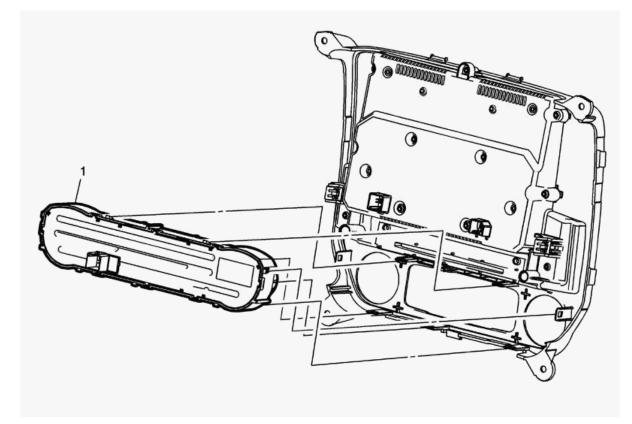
Heater and Air Conditioning Control Courtesy of GENERAL MOTORS COMPANY
